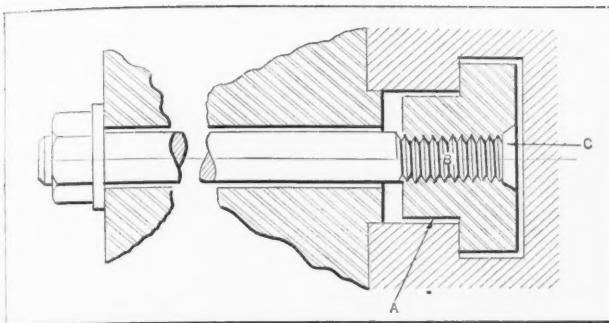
Improved Clamping Shoe and Stud for Tool-block
